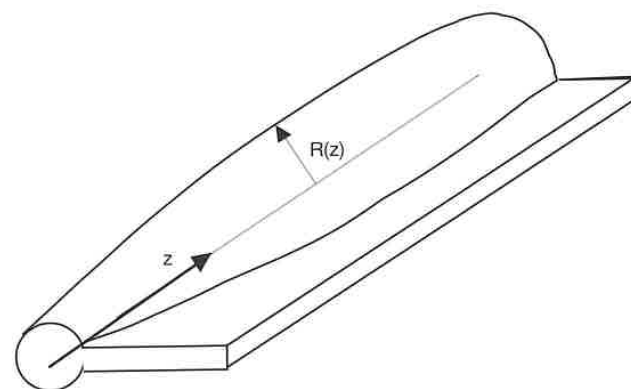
End-fed variable diameter manifold sheeting die coordinates and dimensions.
